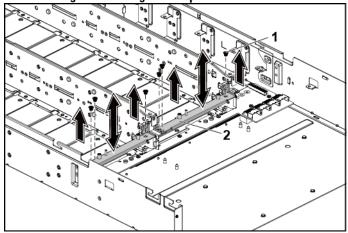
Removing and Installing the Mid-plane Holder Support
